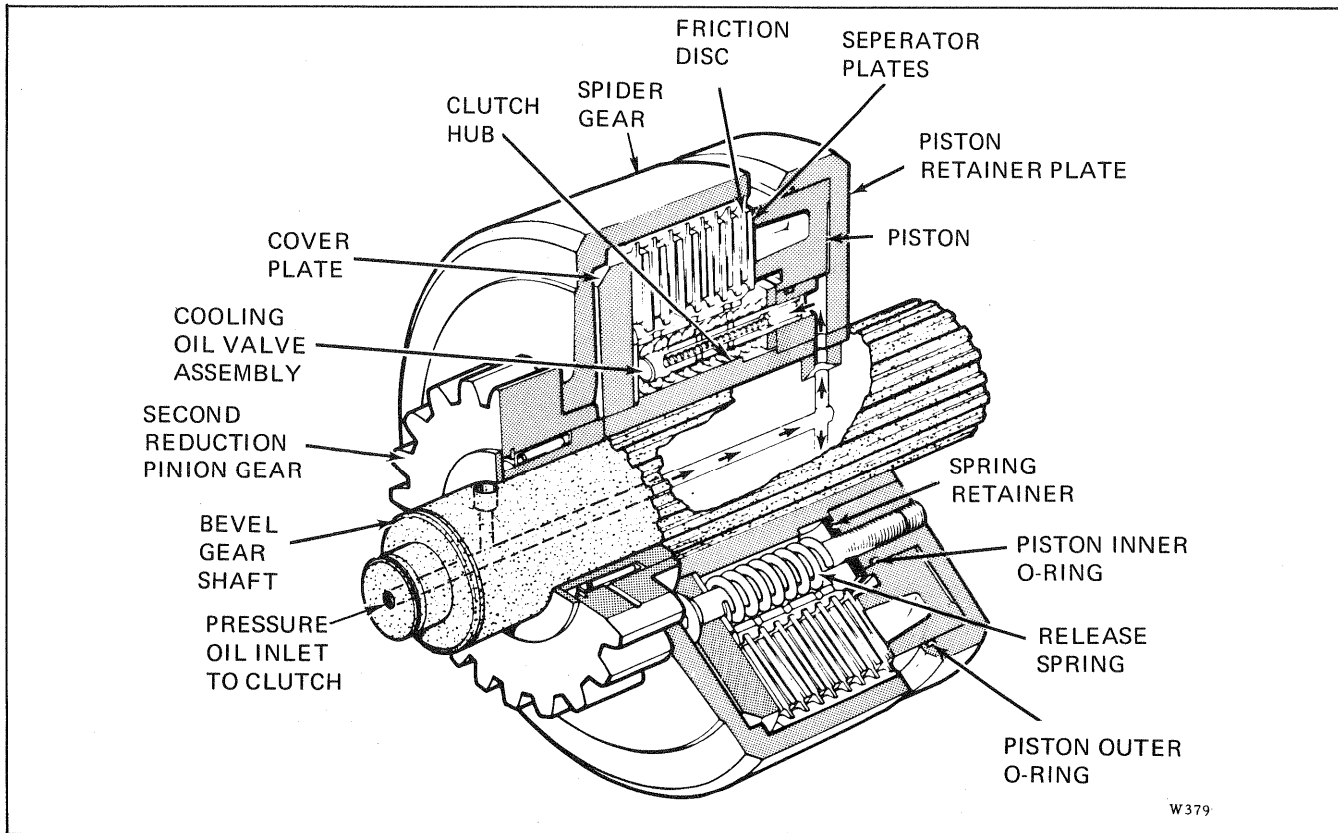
POWER CONTROLLED OIL CLUTCH ASSEMBLY
